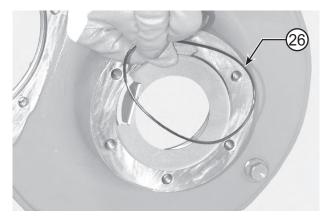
Install the oil shield plate (18) and o-ring (26) with oil inlet facing upwards.
